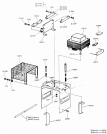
EXPLODED VIEW OF THE MECHANICAL ASSEMBLY.
